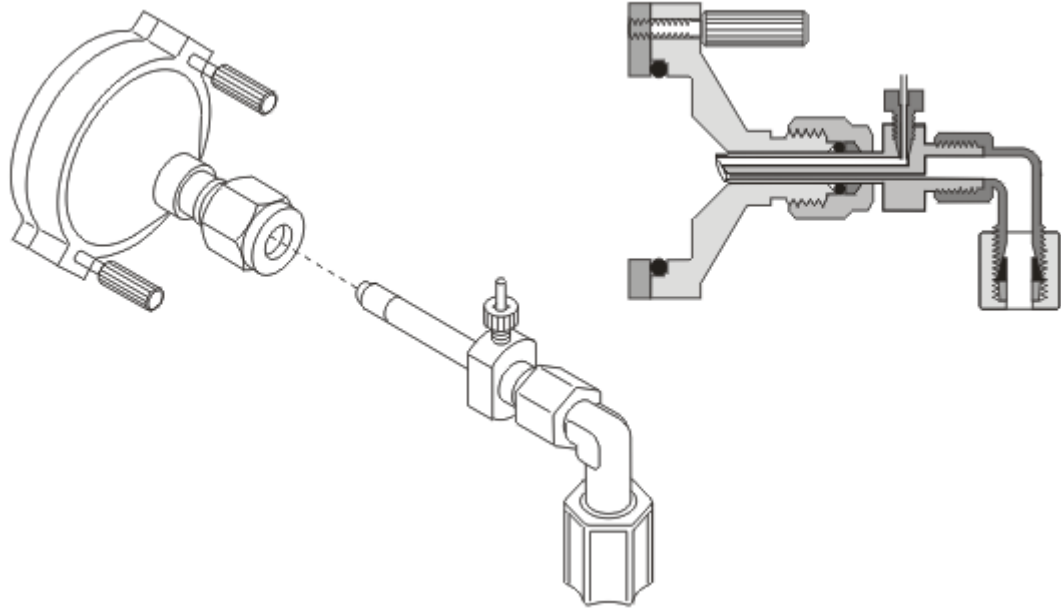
GemCone nebulizer and end cap N0680343 (also shown in cross-sectional view).
